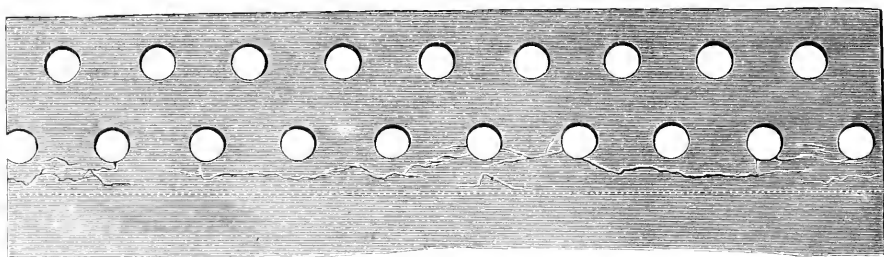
A PLATE DESTROYED BY A HIDDEN FRACTURE.
